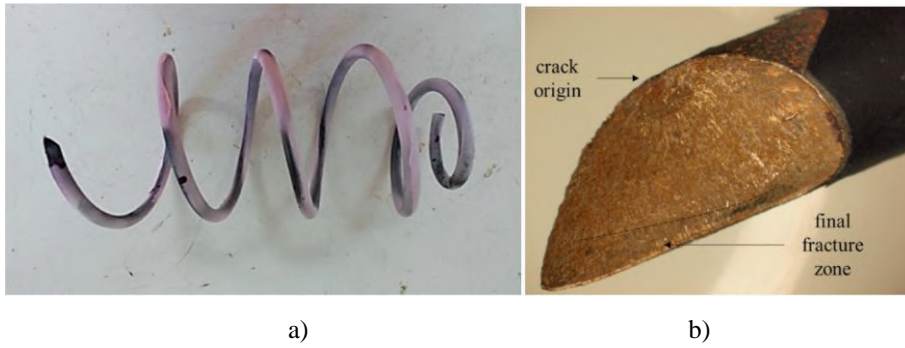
a) Fractured coil spring. b) Fracture surface.
